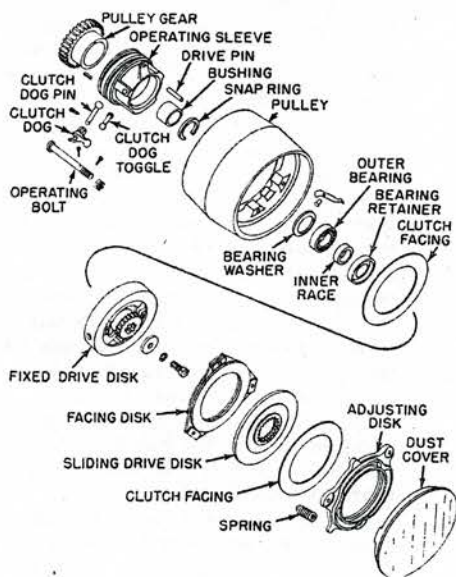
A Exploded view of pulley and clutch. Models 50, 60
